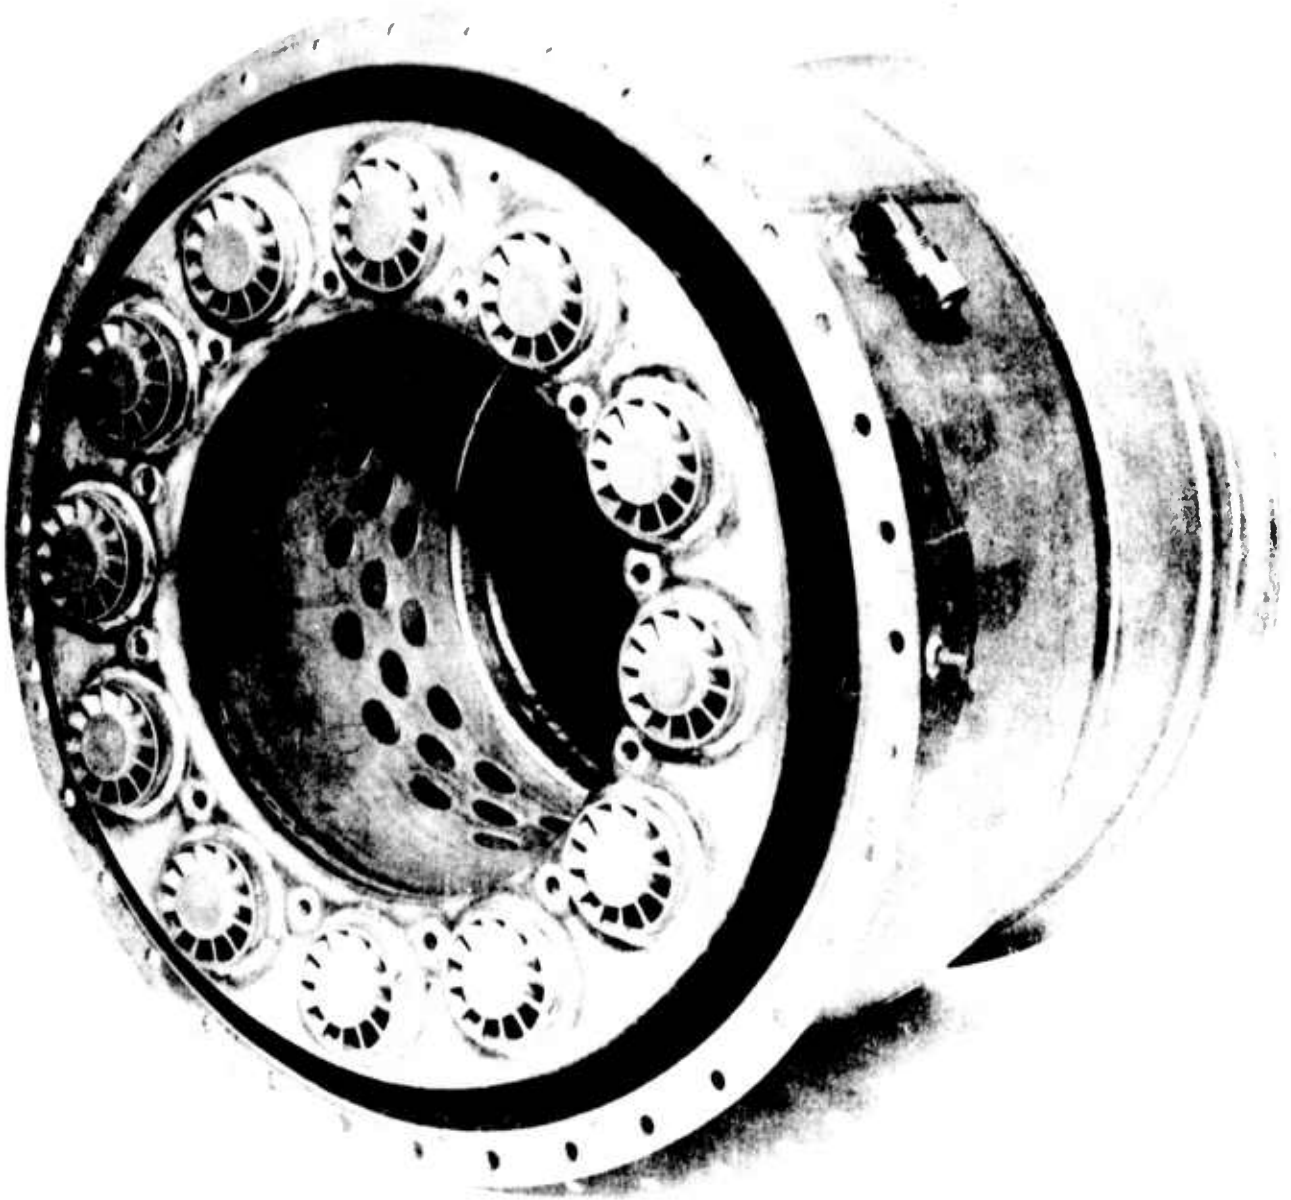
Combustor and Turbine Nozzle Assembly (Forward View). The Improved Combustor is Shown in Figure 52.
